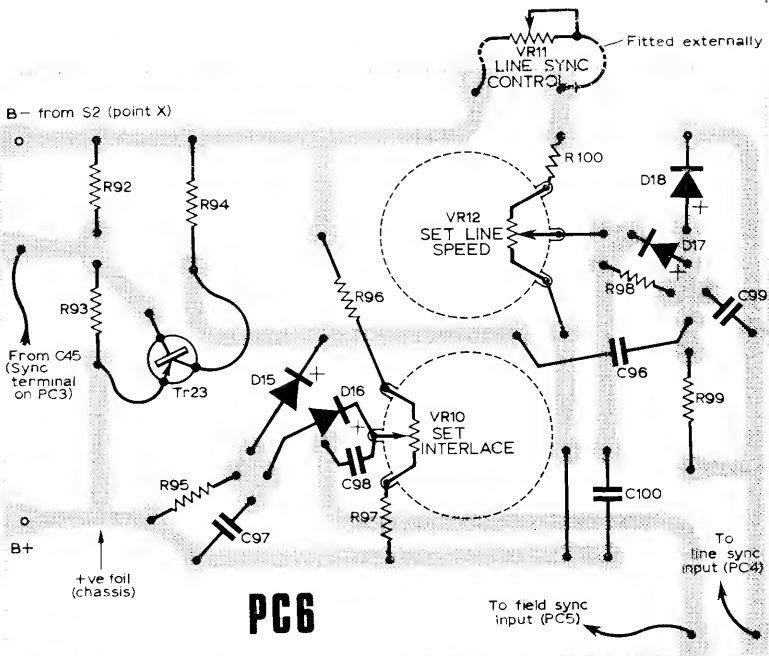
The printed board of the sync control unit (PC6). The copper parts are shown shaded.
